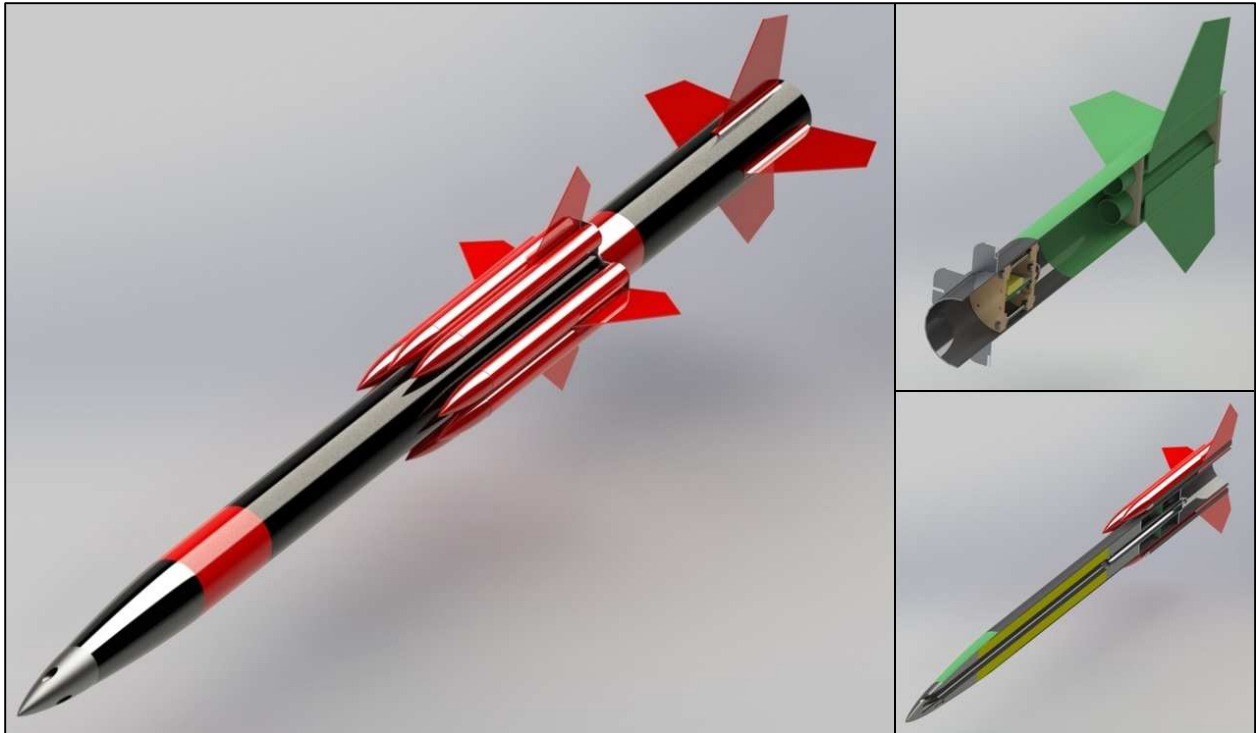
The two-stage penetrator showing the out-board motors, and cutaway views of the boost stage and penetrator; the sustainer stage was integrated directly into the penetrator airframe.
